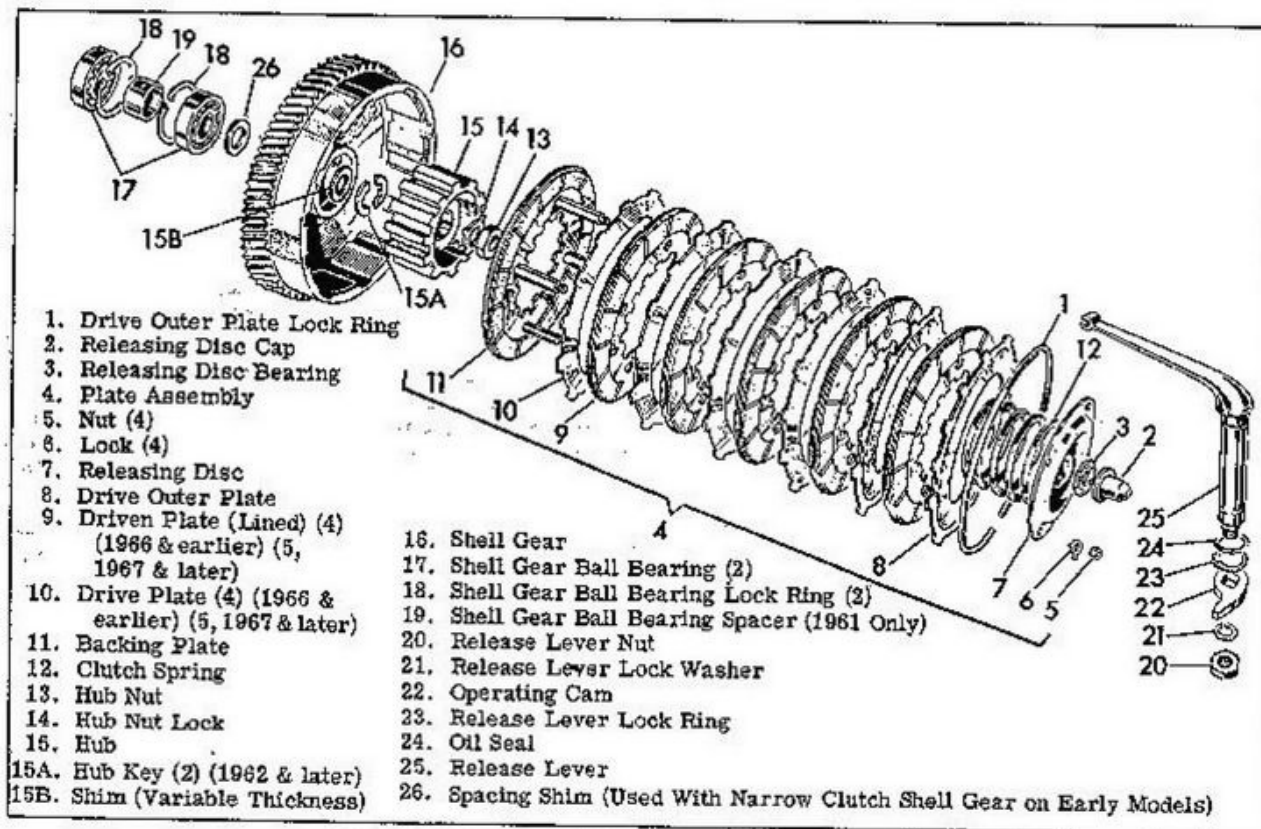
B-37. Clutch (1968 & Earlier) - Exploded View
